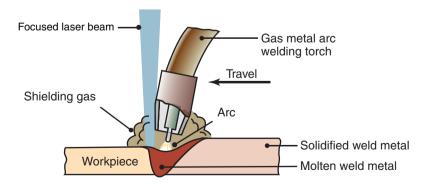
Schematic illustration of the Laser GMAW hybrid welding process. *Source:* Courtesy of Lincoln Electric.
